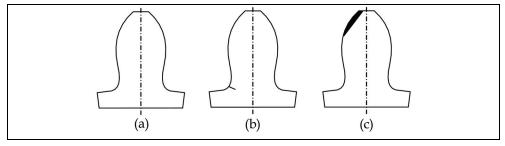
Gear conditions tested: (a) healthy gear, (b) cracked gear; (c) chipped gear.
